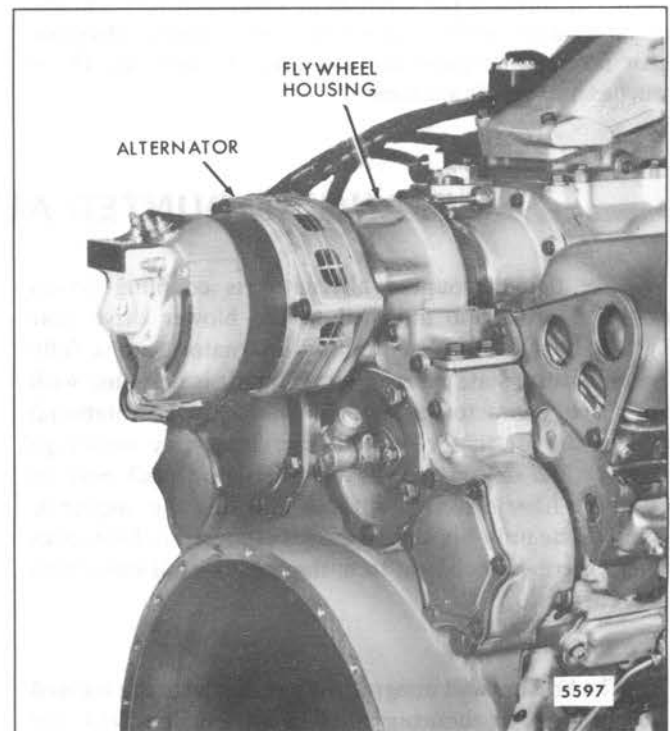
Typical Flange-Mounted Alternator (Beltless)
